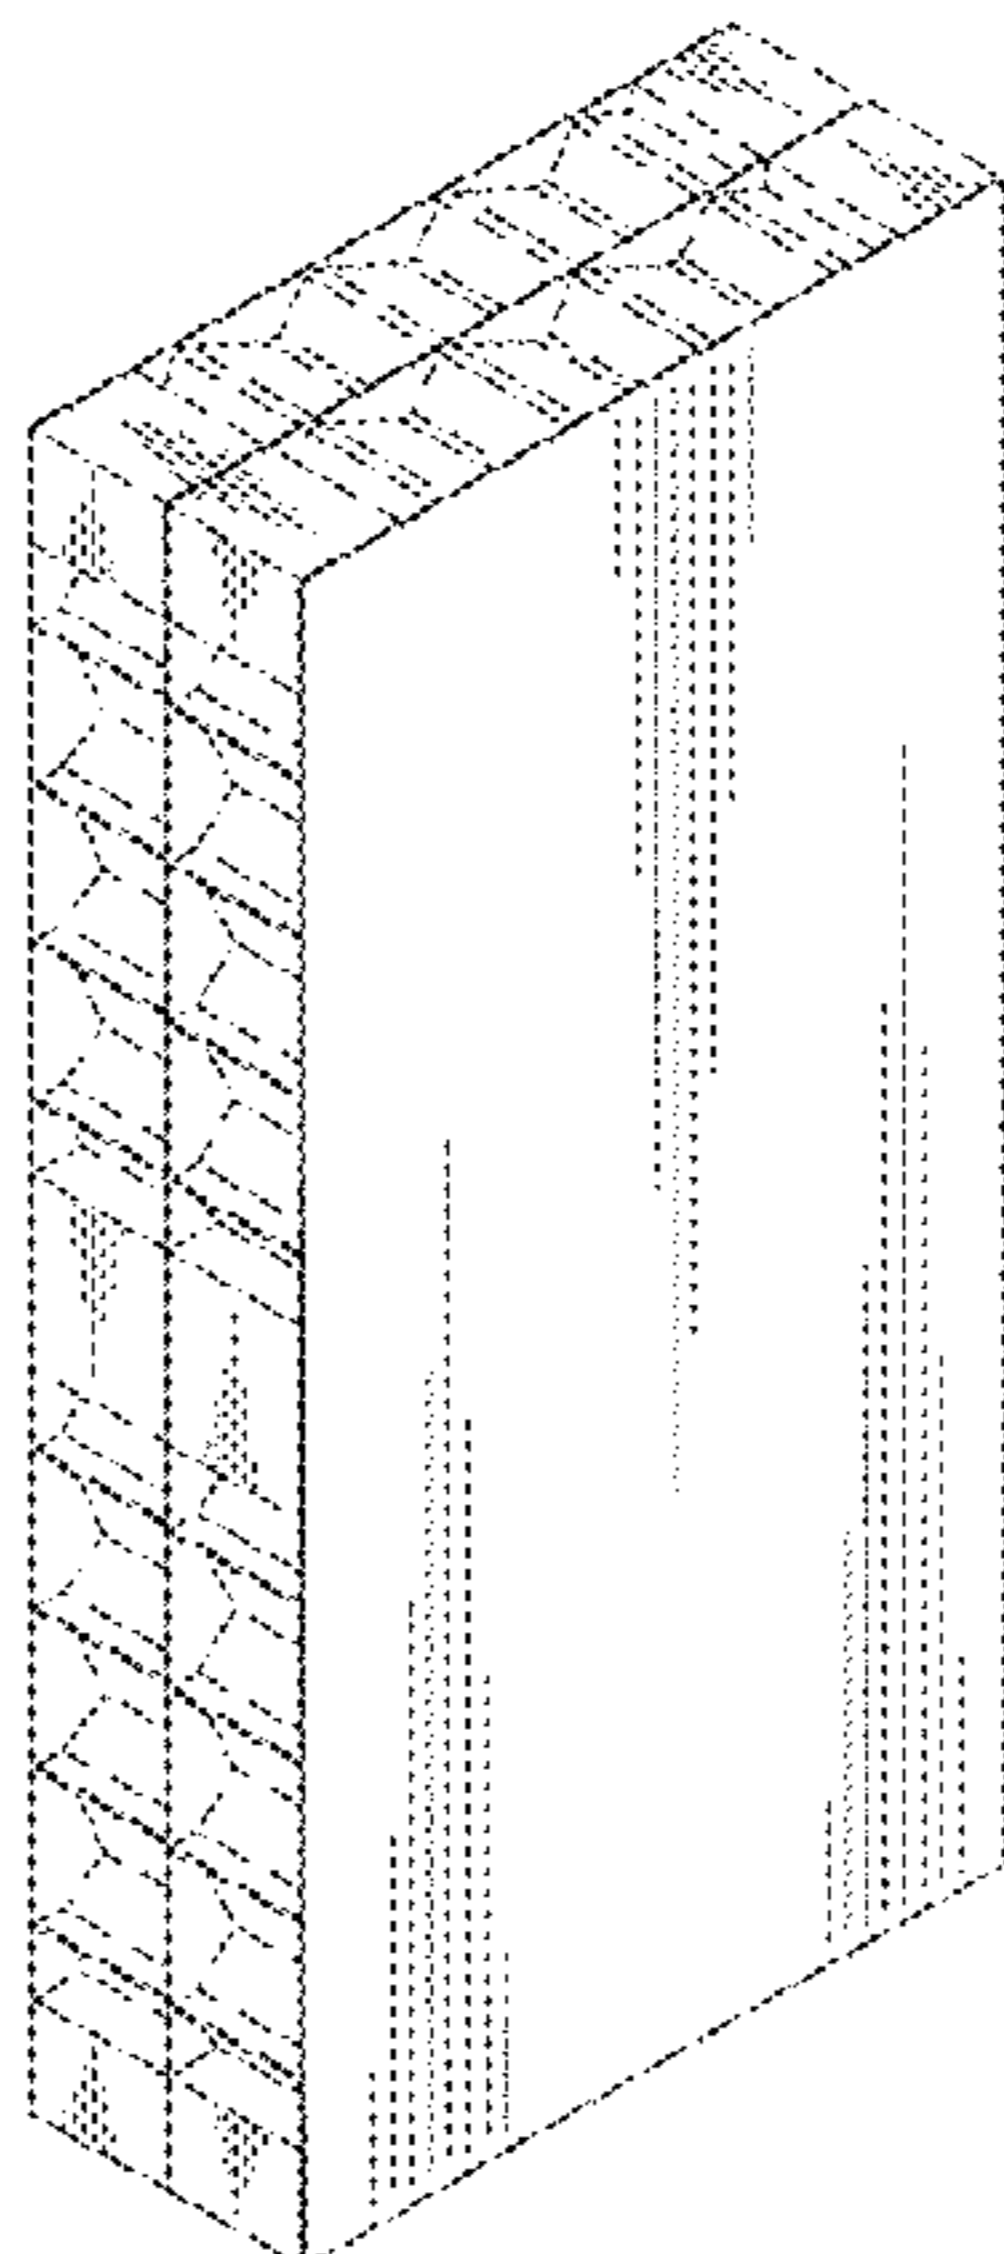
is a perspective view of a double block honeycomb panel void-filler of our new design.
